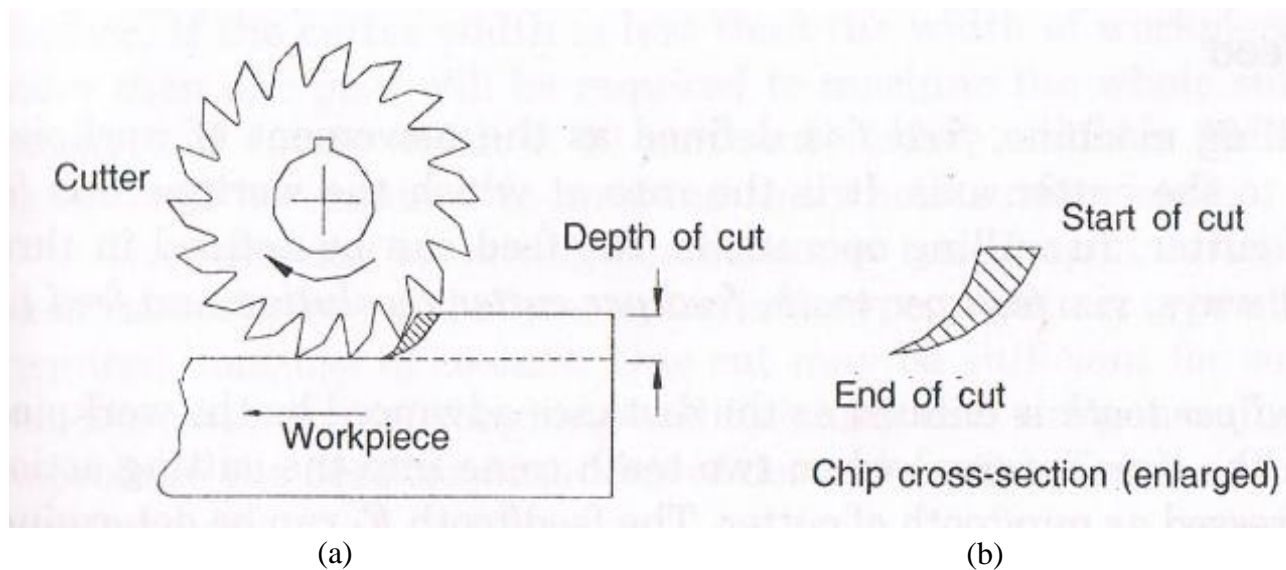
Down milling operation: (a) direction of the cutter rotation and (b) the chip cut by a cutter tooth
